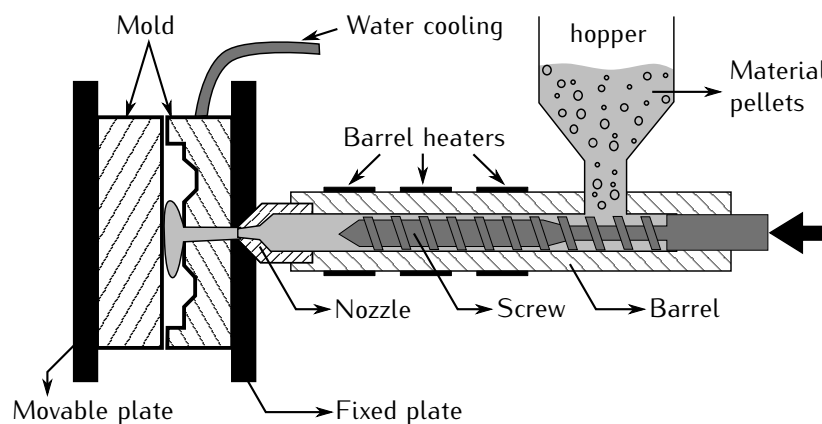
Drawing of an injection molding machine for thermoplastic materials.
